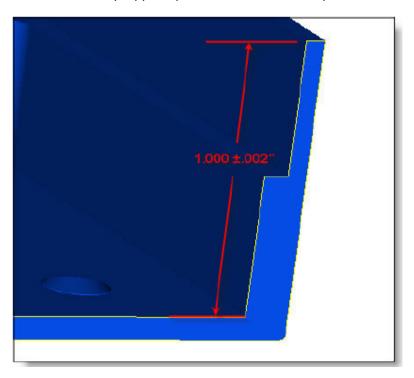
Faces on the same side are easier to hold to tight tolerances, Source: Pro CNC Inc.
